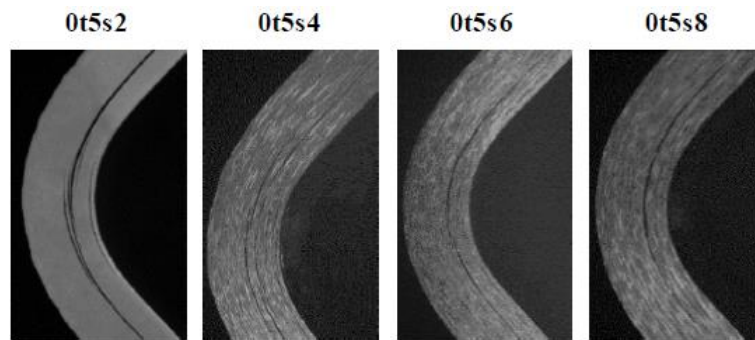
Post-mortem pictures of specimens after failure adapted from [106]
